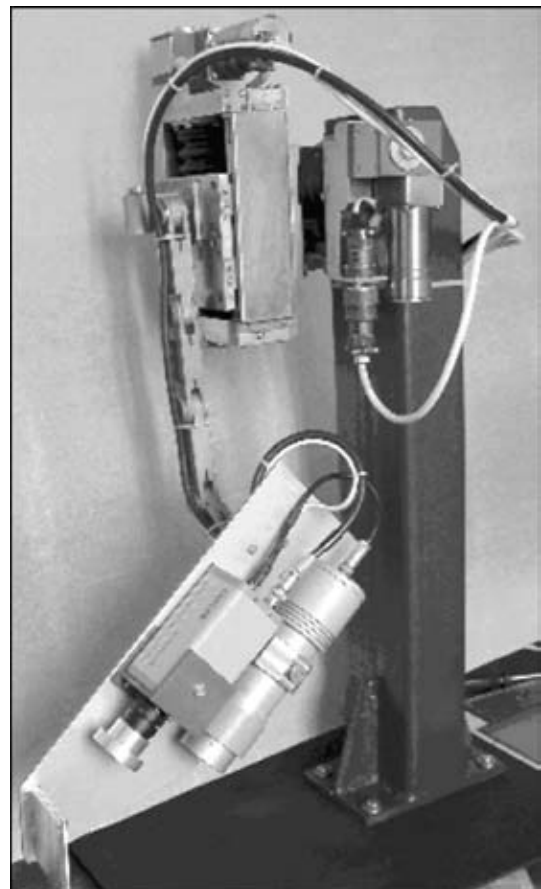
General view of a manipulator with a laser-TV unit (protective housing is removed) of open system of butt following
